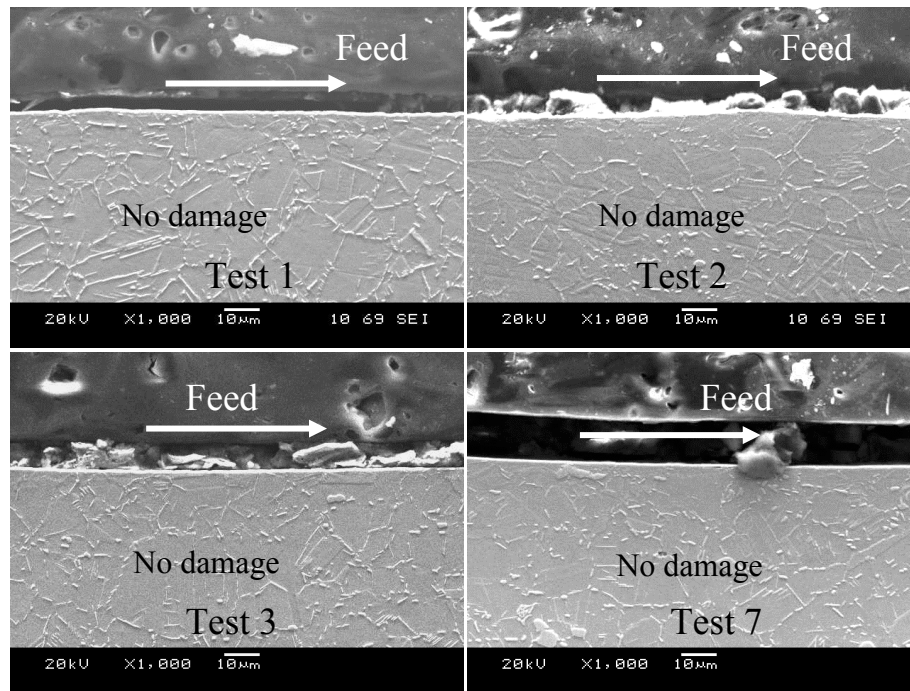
Cross sectional SEM images of workpiece sub-surface of Tests 1, 2, 3 and 7 produced with worn tools in a direction parallel to feed
